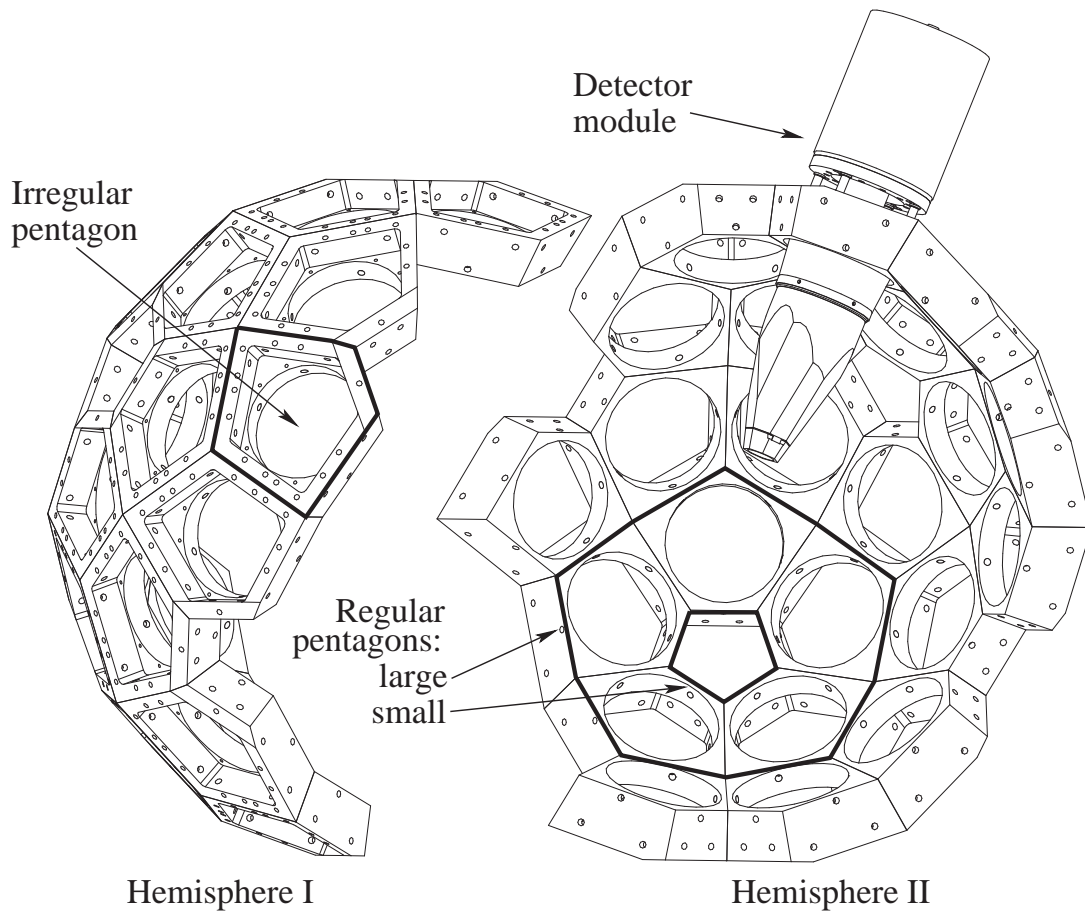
Schematic drawing of the JUROGAM supporting structure with the detector frame and the mounted detector modules.
